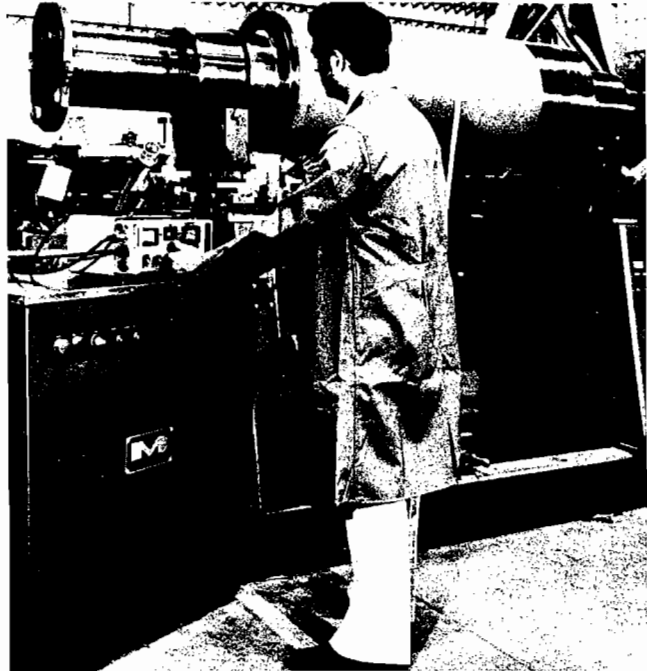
Portable Instrumentation May be Detached and Used for In-Place Balancing and Vibration Analysis of Plant Machinery.
